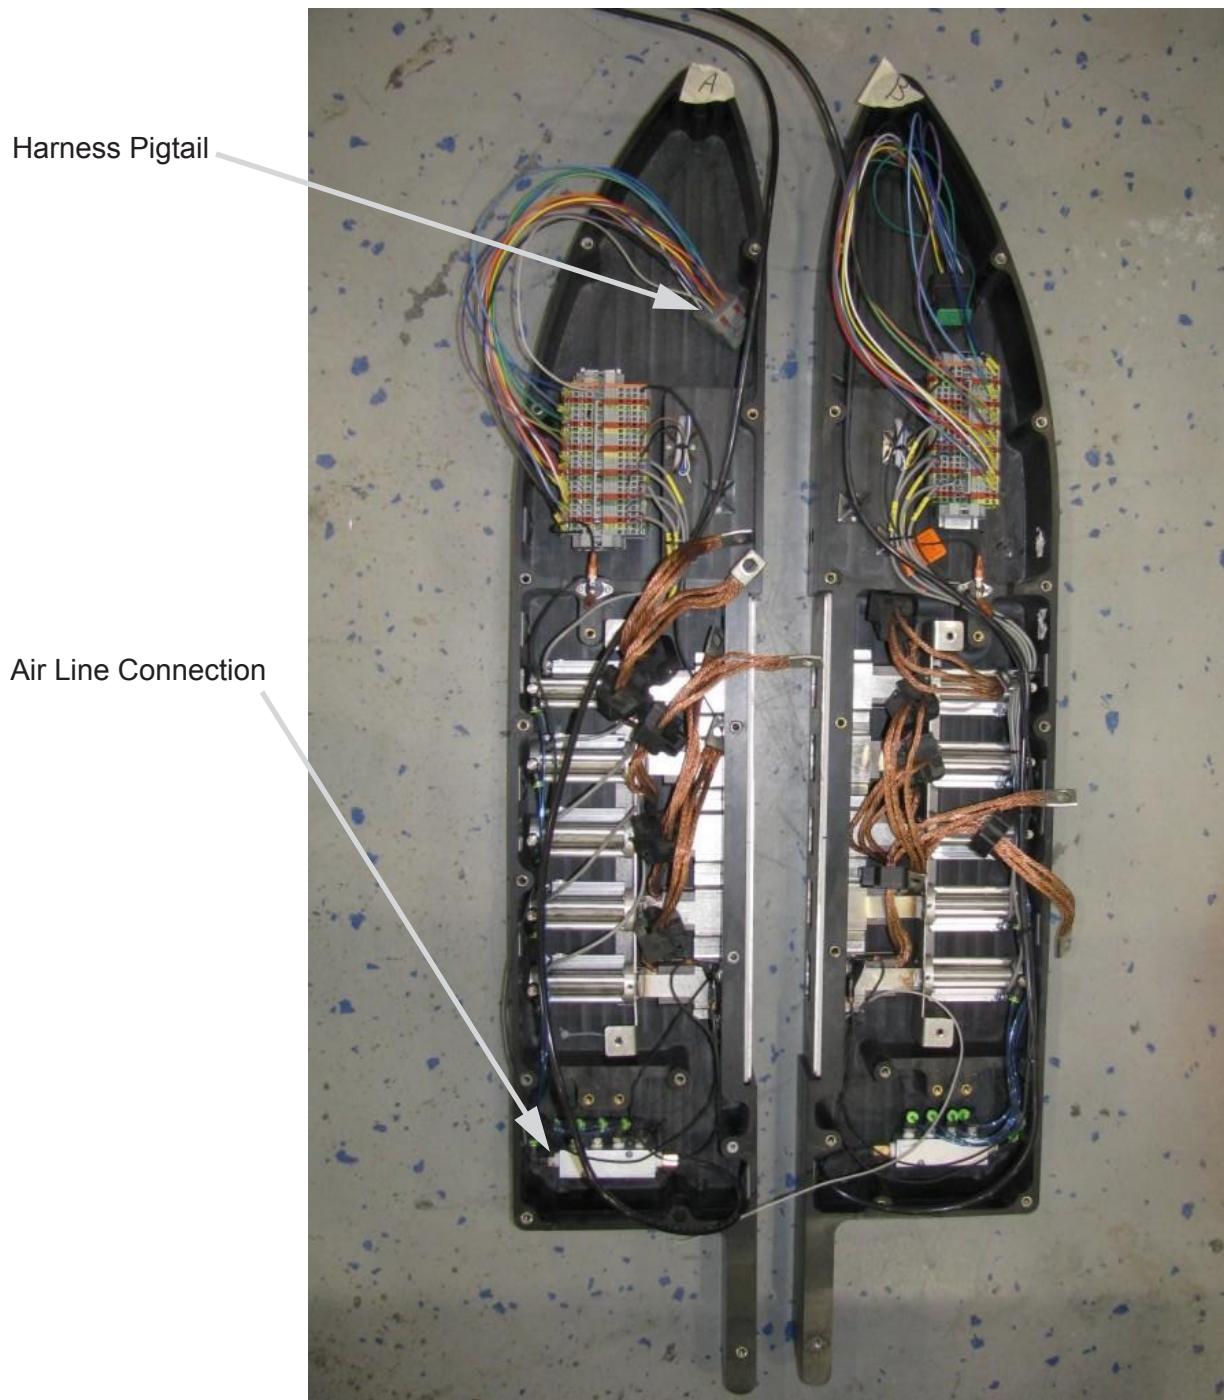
Actuation Brush Assembly - Disconnecting Harness Pigtail and Air Line Connection
